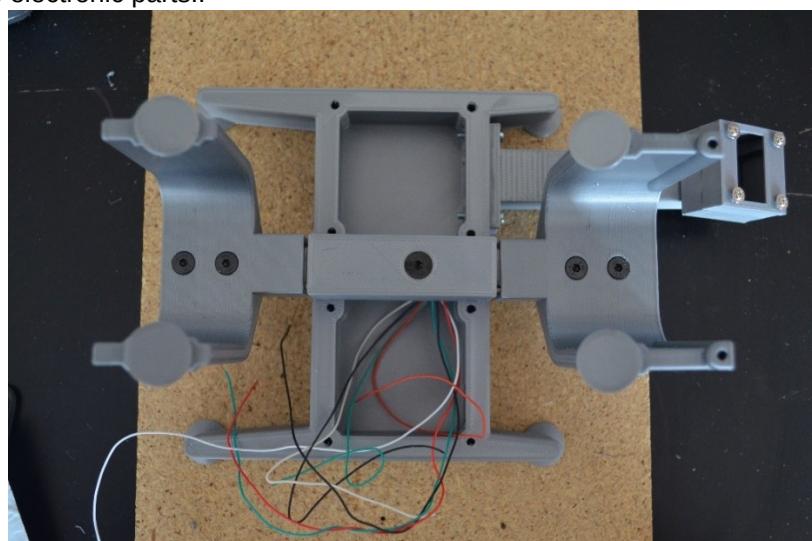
Step 4 – The balance finished with all the assembled mechanical elements.
